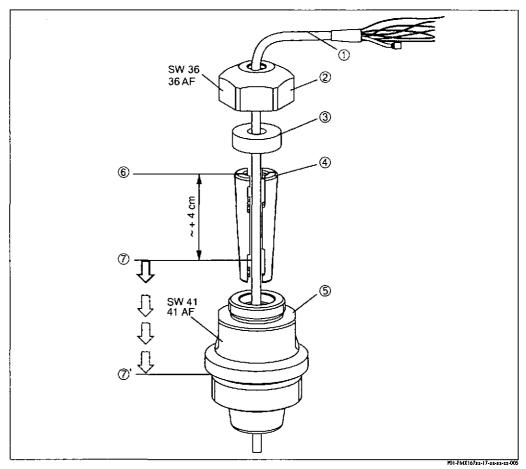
Installing the Waterpilot FMX167 with cable mounting screw, here depicted with G 1 1/2 thread
